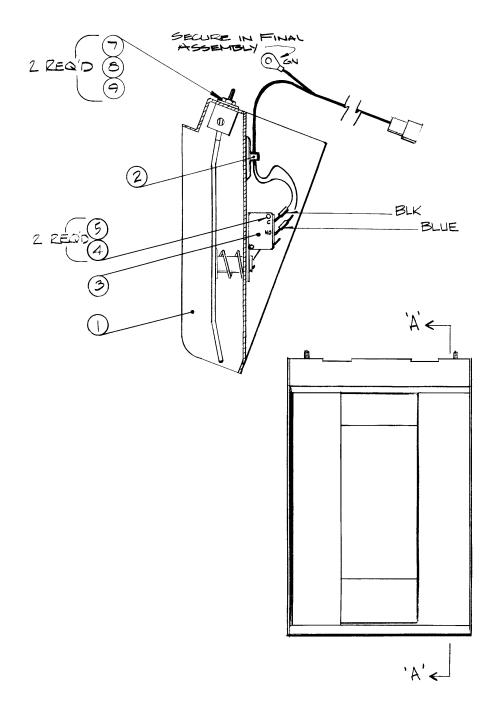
Single Foot Pedal Assembly With Harness Assembly A008845-01 C
